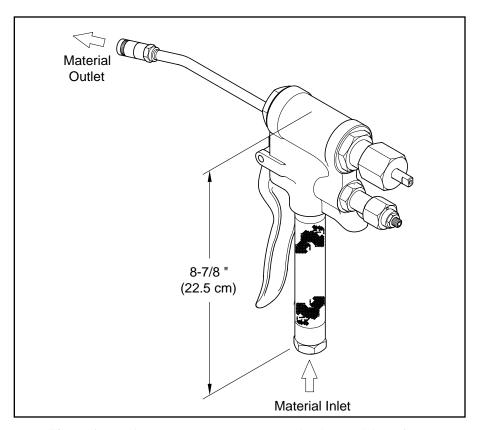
High-Pressure Measuring Control Valve Model 7716-D1
